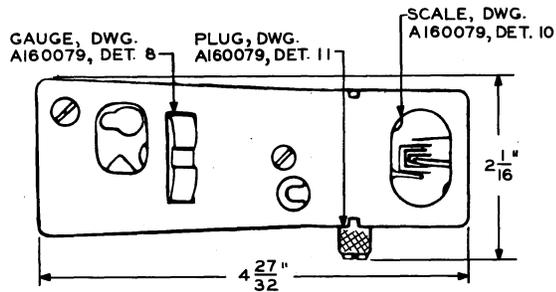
GENERAL VIEW OF NO. 111A GAUGE
